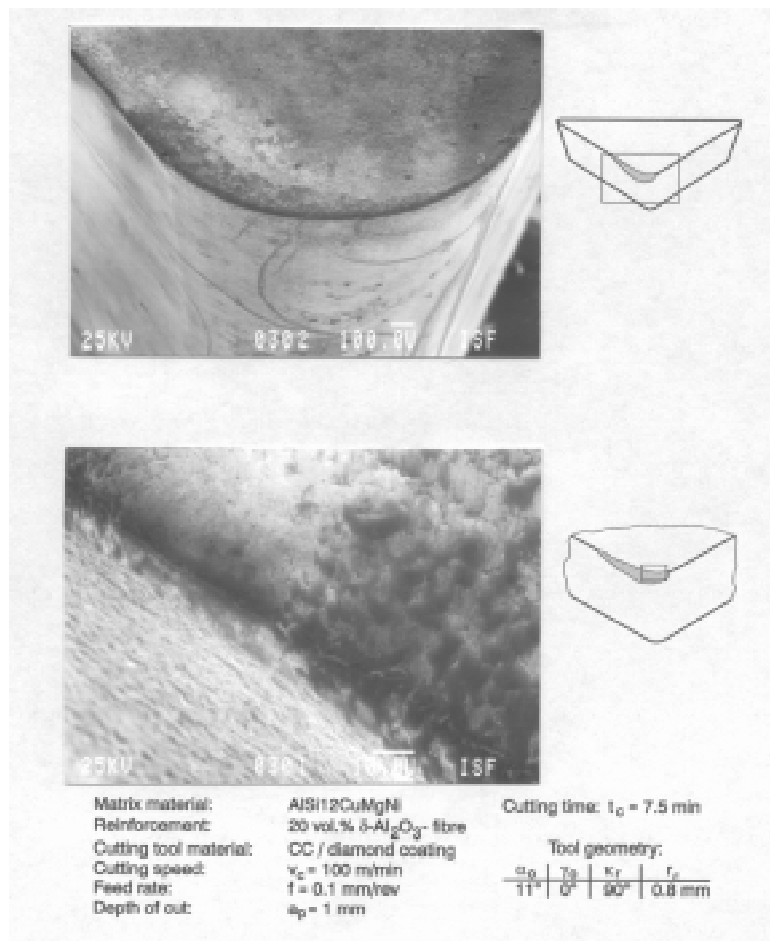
SEM photographs of the tool wear of diamond coated inserts when turning short fibre reinforced aluminium.
